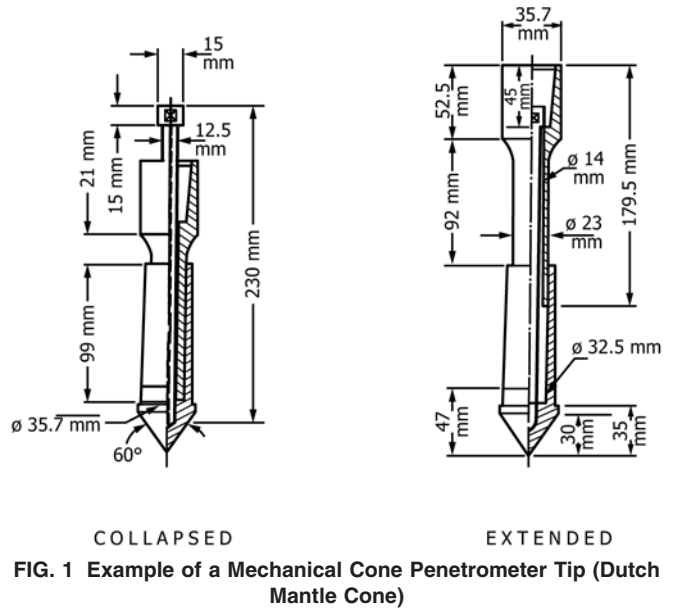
Example of a Mechanical Cone Penetrometer Tip (Dutch Mantle Cone)
